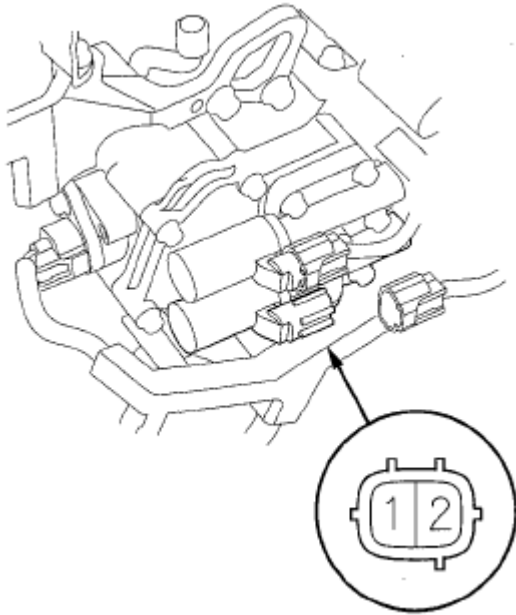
Identifying A/T Clutch Pressure Control Solenoid Valve B Connector Terminals
